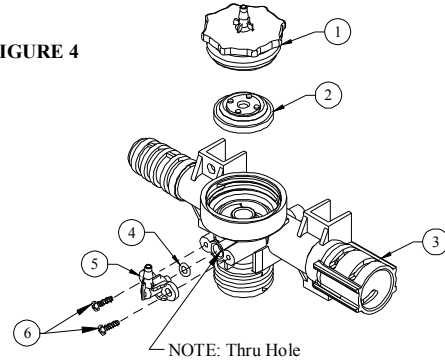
REMOTE FILL VALVE SUBASSEMBLY
